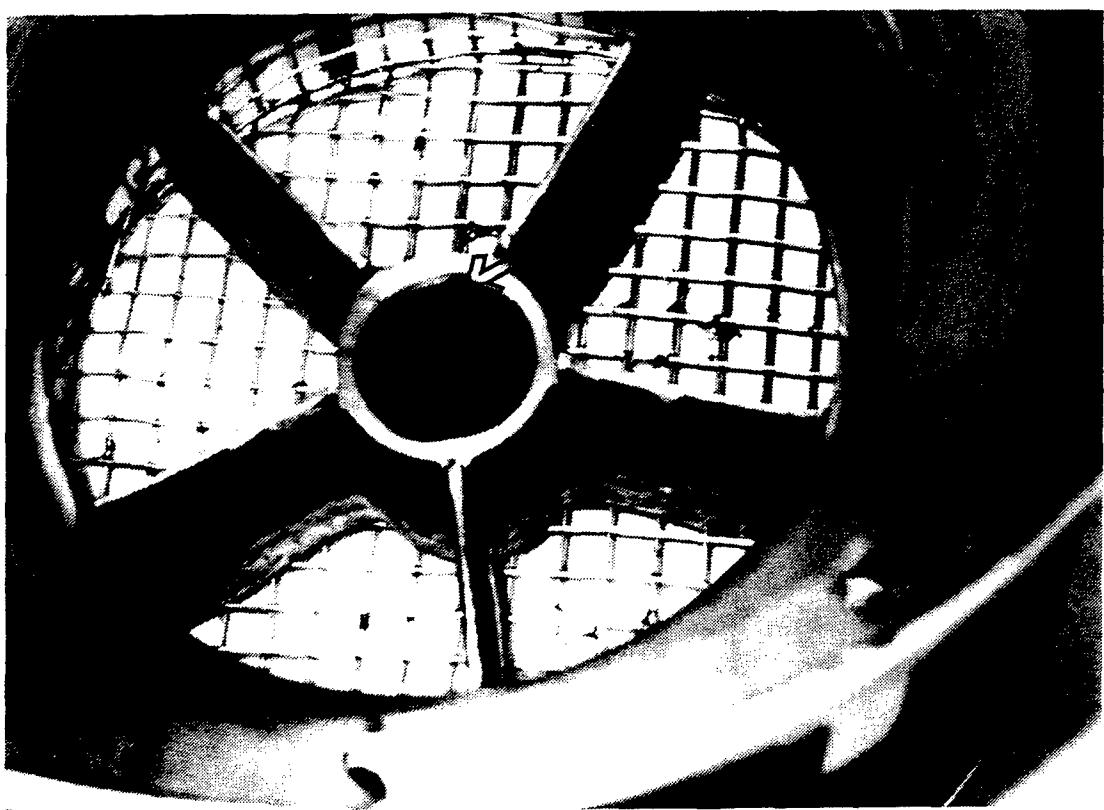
Damage to carbon impregnated bushing on CCN-150 lower impeller support.
